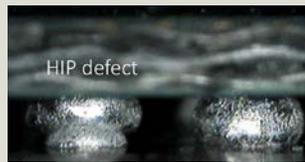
Head-in-pillow defect compared with a good solder joint
